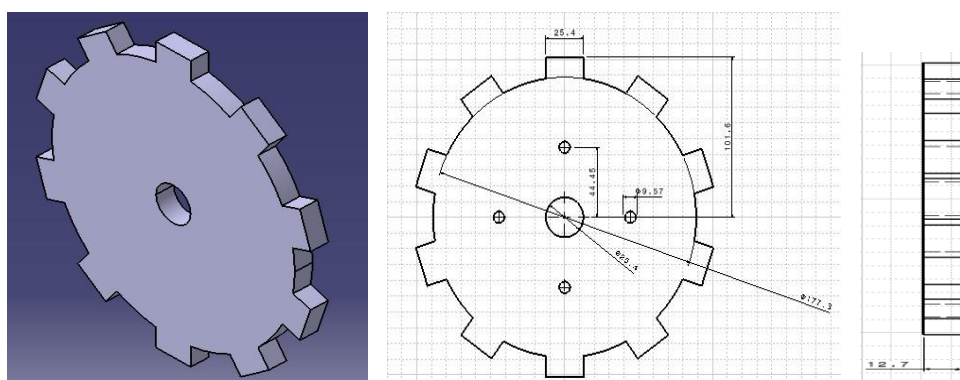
Sensor Gear (Left); Cross-section of the Sensor Gear (in mm, Right)
